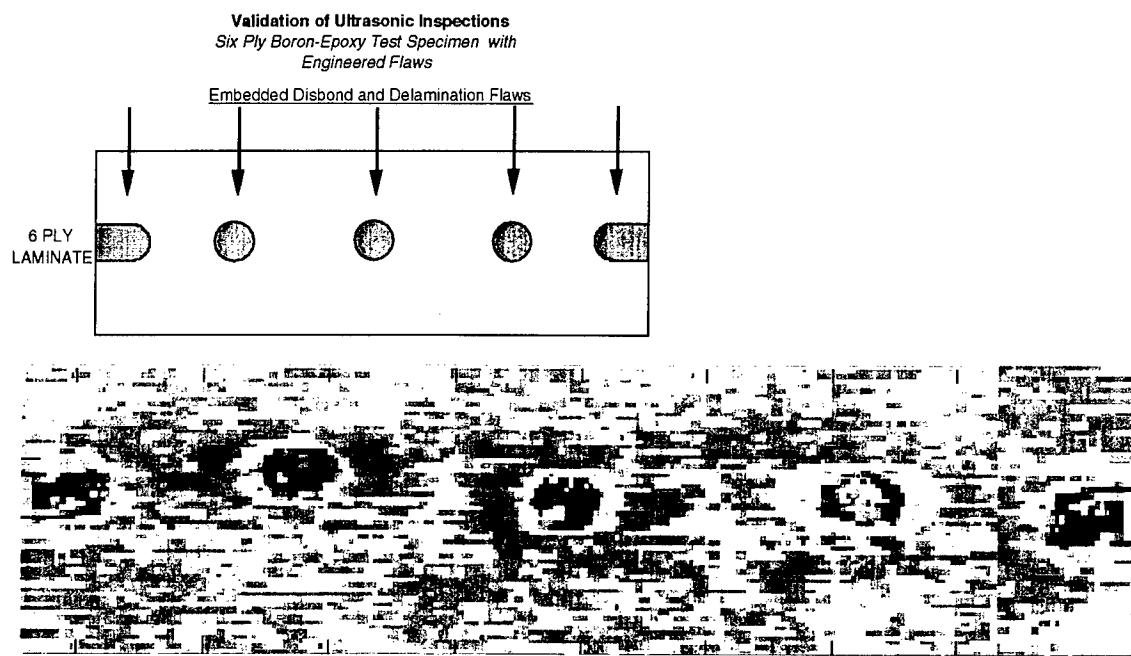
Pulse-Echo Ultrasonic C-Scan of 6 Ply Bonded Composite Doubler Specimen with Engineered Flaws
